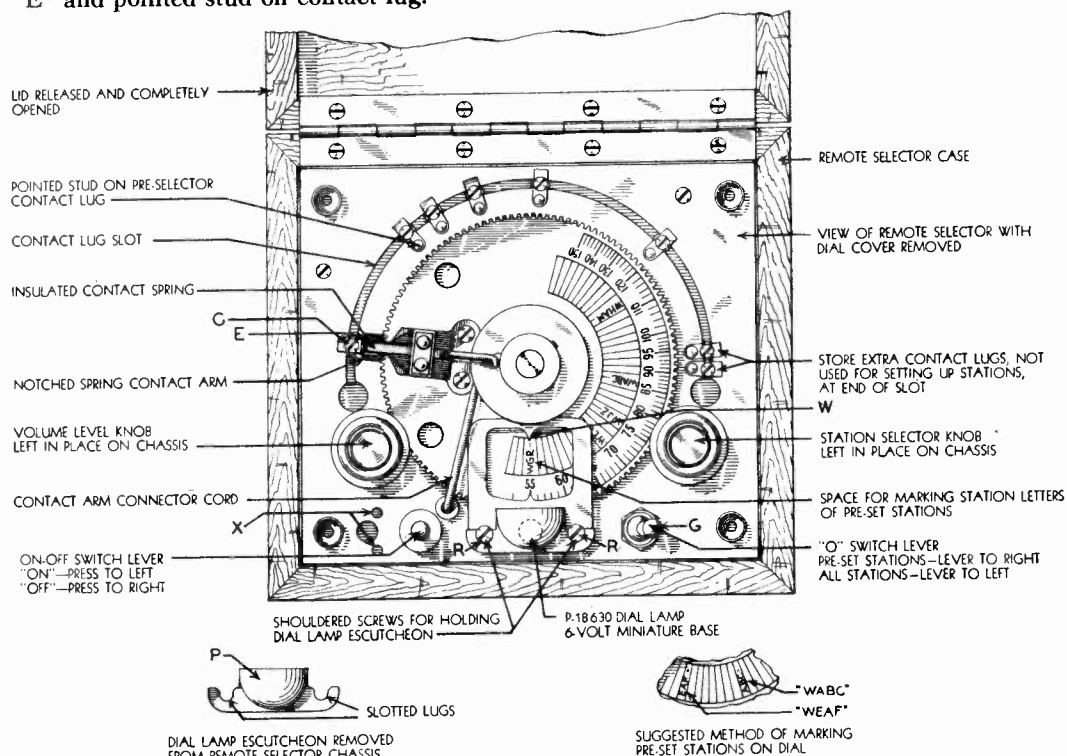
Remote Selector Unit of No. 55 Te-lek-tor-et with Dial Cover removed for setting Pre-Selector Mechanism.
